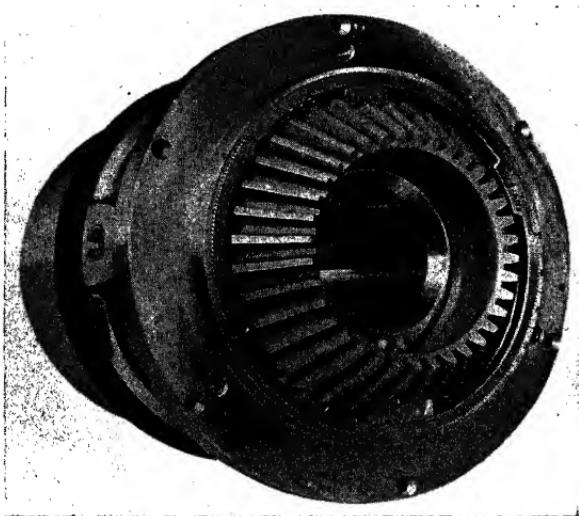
Piston and cam assembly—low-pitch position, high r.p.m. The setting is stamped on the ring outside the gear.
